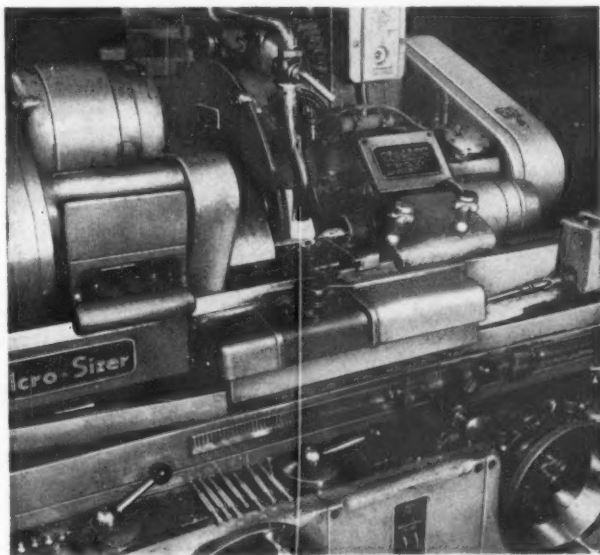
Churchill Fulcro-Sizer cylindrical grinder installed for handling a variety of shaft components
